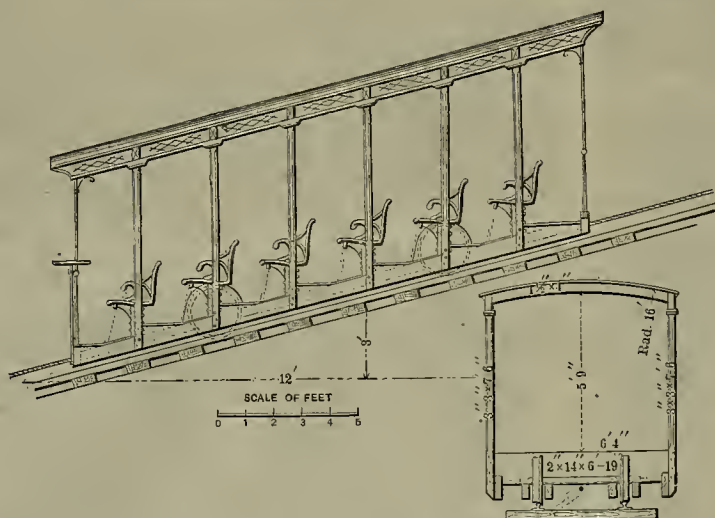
CAR FOR LOOKOUT MOUNTAIN INCLINE.
